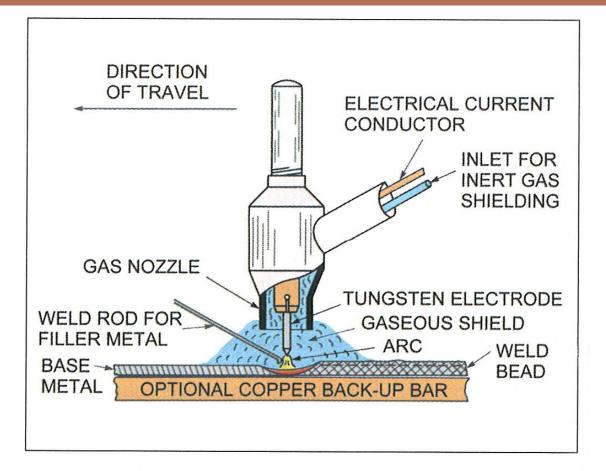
Schematic Representation of Gas Tungsten Arc Welding
